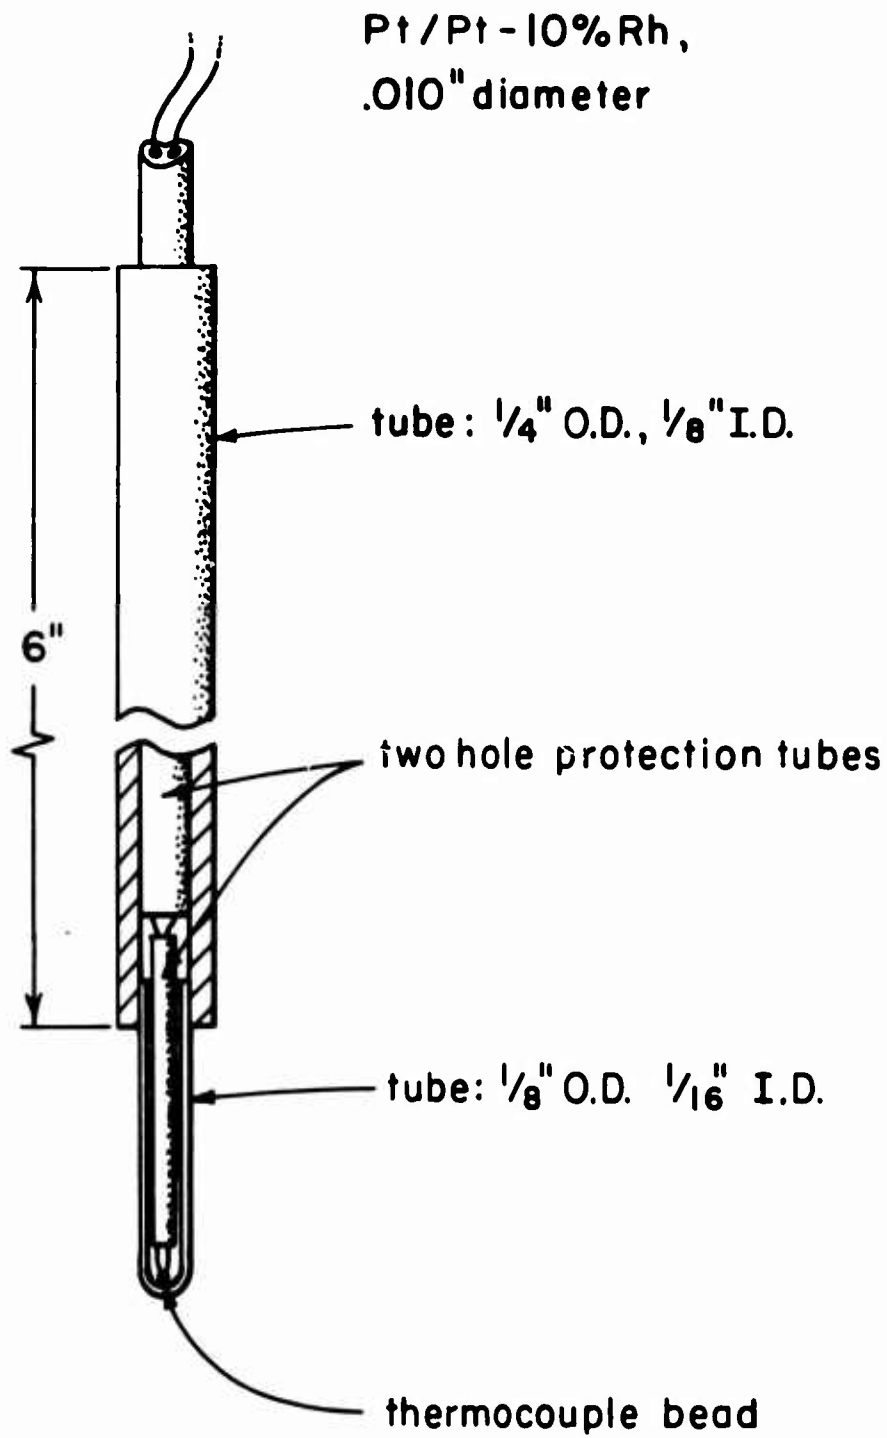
Thermocouple assembly for liquidus temperature measurements.
